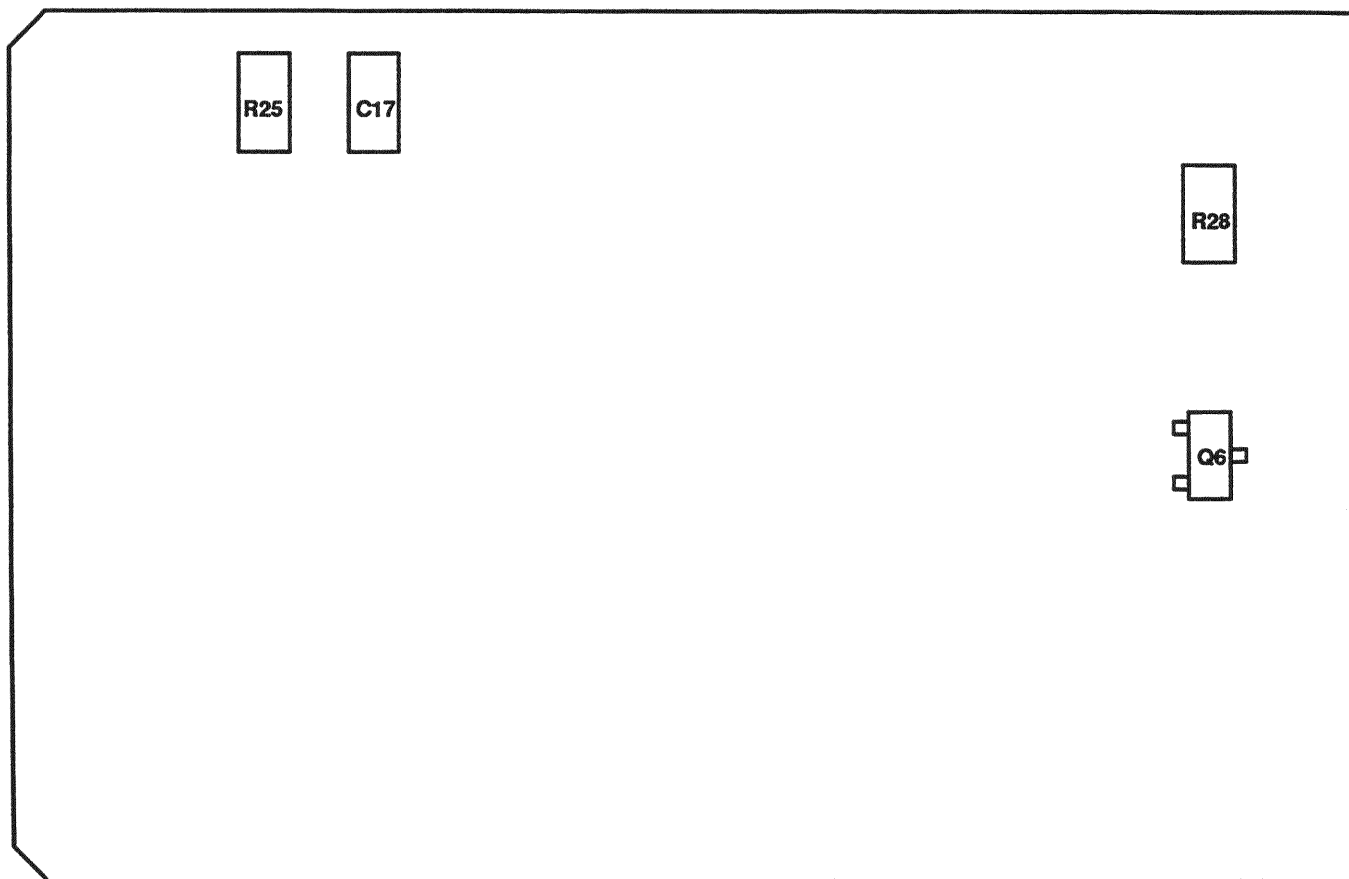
A7A1 Power Supply Control PWB Assembly Component Location Diagram
